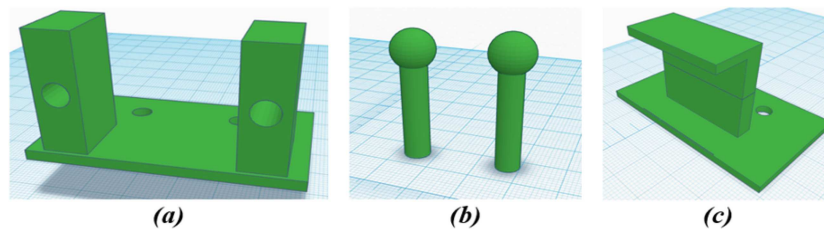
3D models of supporting structures. (a) Planar coil holder. (b) Holder pins, for inserting through holes of planar coil PCB to secure it to the holder. (c) Magnetic ribbon holder.
